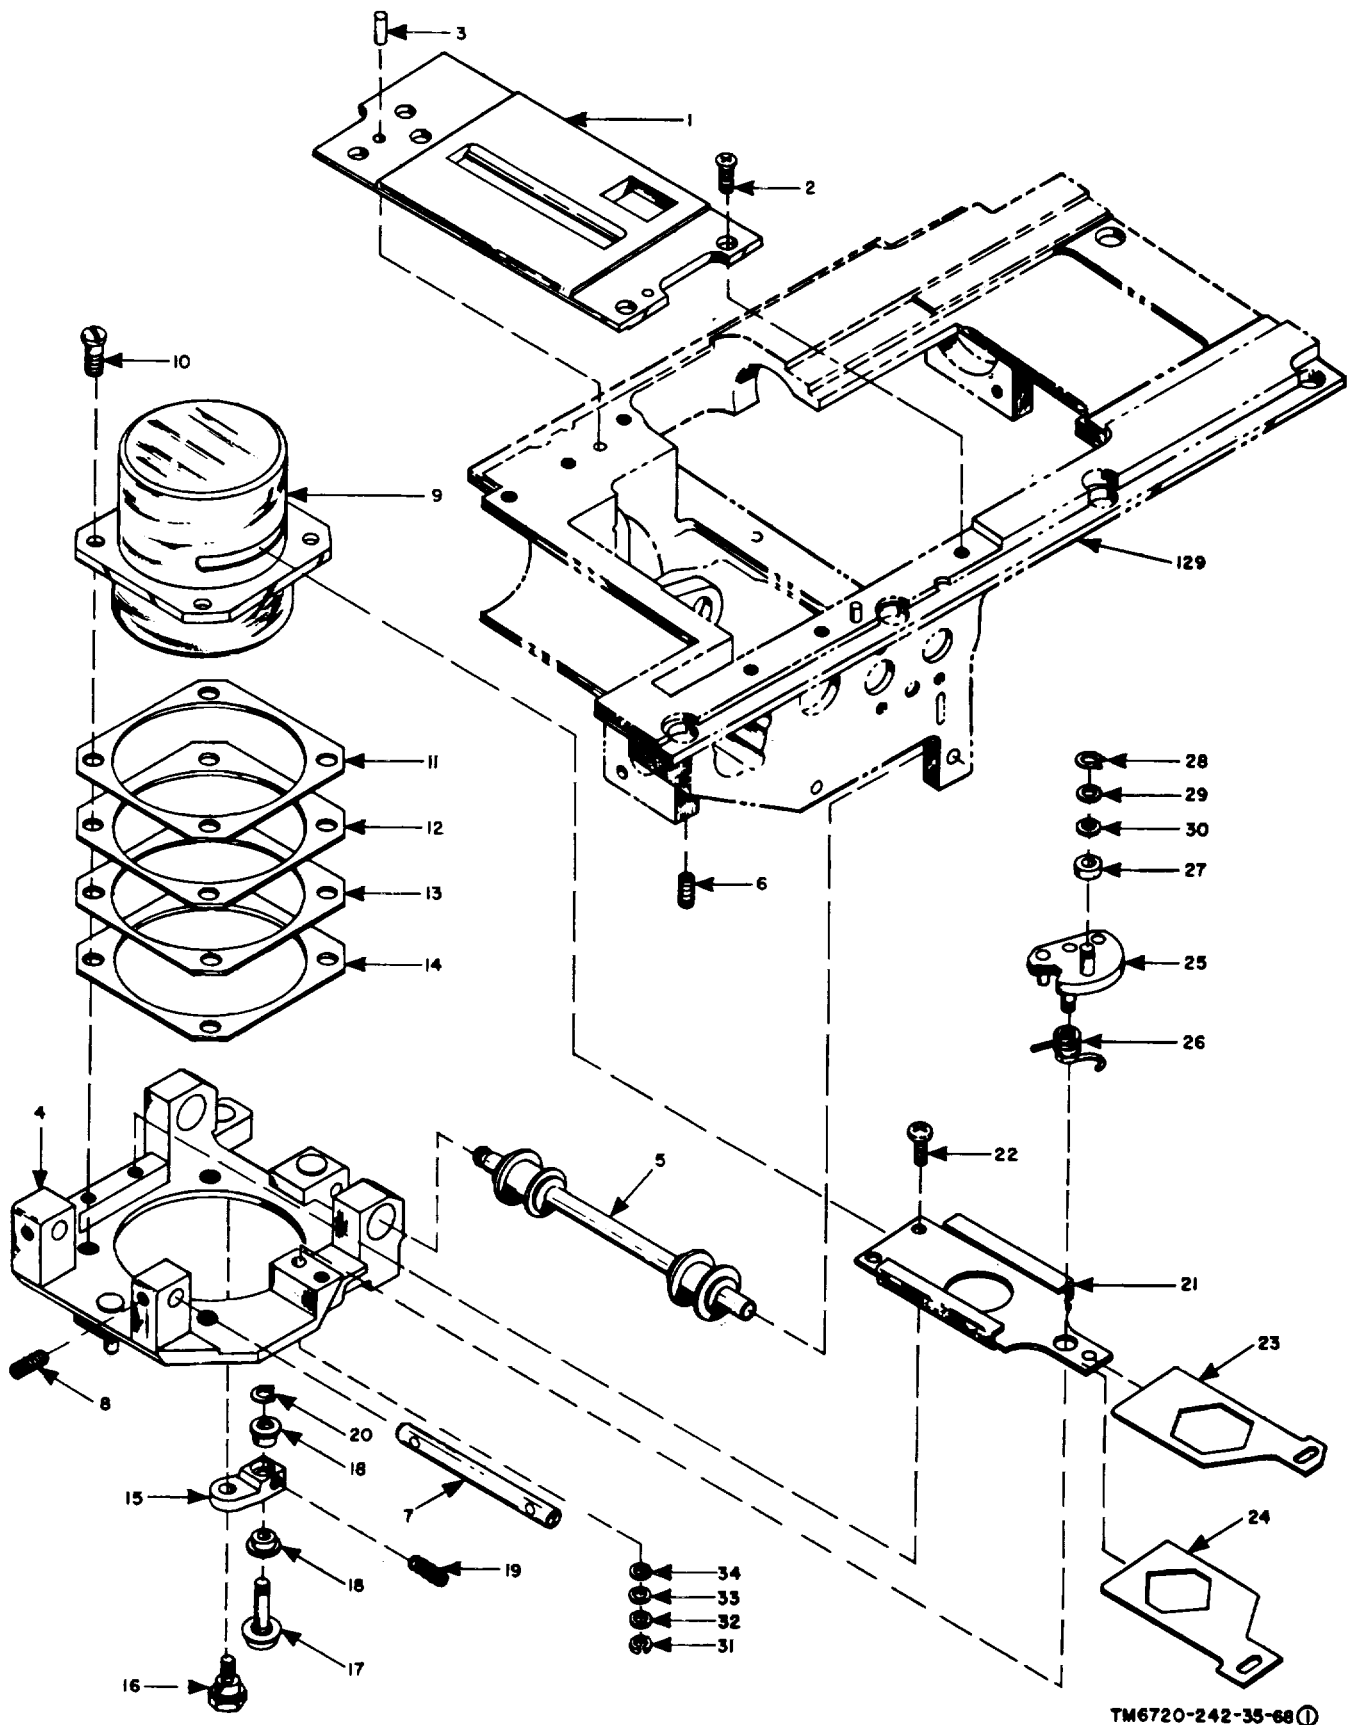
Aec assembly, exploded view (part 1 of 4)
